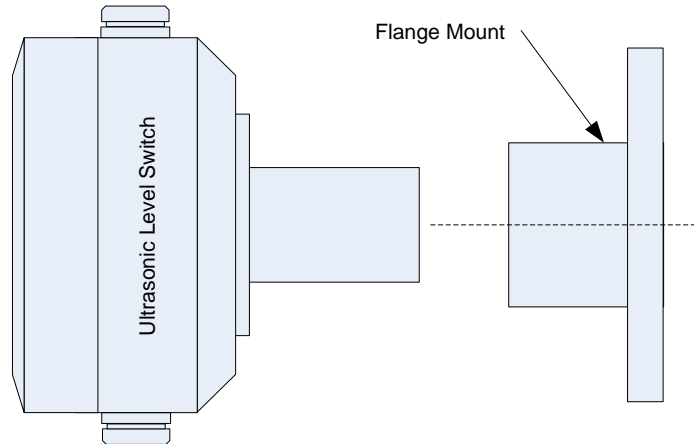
The flange mount screws onto the transducer nozzle allowing the nozzle to extend 1/4" (6.35mm) beyond the flange.
